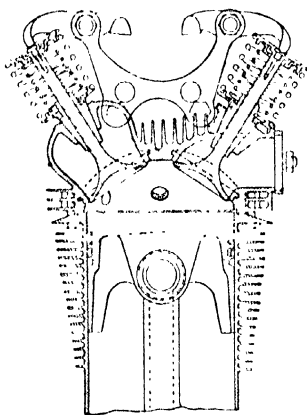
R.A.F. Cylinder, with Aluminium Head fixed with Studs and Bolts.
